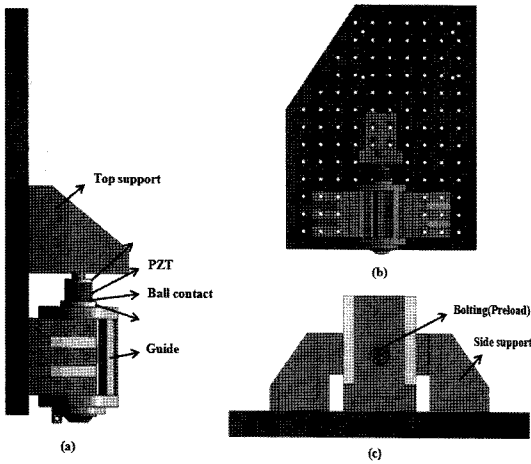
Assembly mechanism ; (a) Side view (b) Front view (c) Magnified top view
